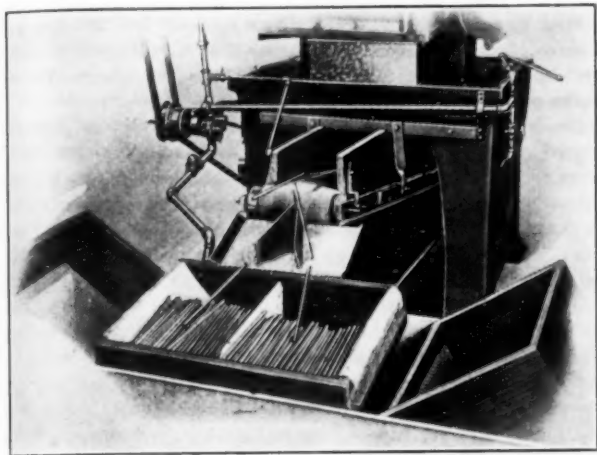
REAR VIEW OF EXTRUSION PRESS, SHOWING CARRIER BELT AND METHOD WHEREBY TUBES ARE CARRIED INTO BOXES
